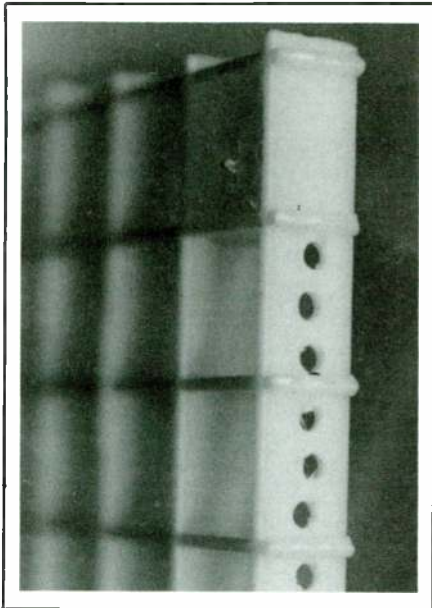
Outside detail of epoxy-filled square prior to drilling mounting holes.
